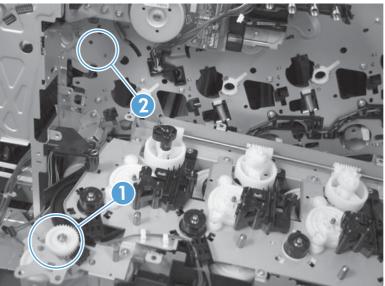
Reinstall the main drive assembly (5 of 11)
